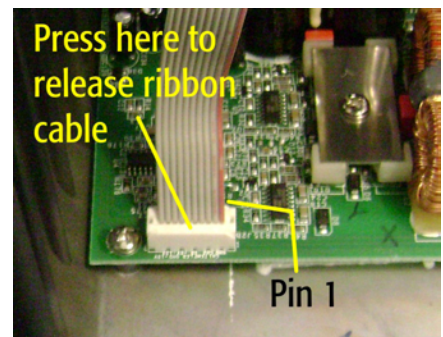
Press down on the housing to release the ribbon cable; insert cable into housing to reattach.
